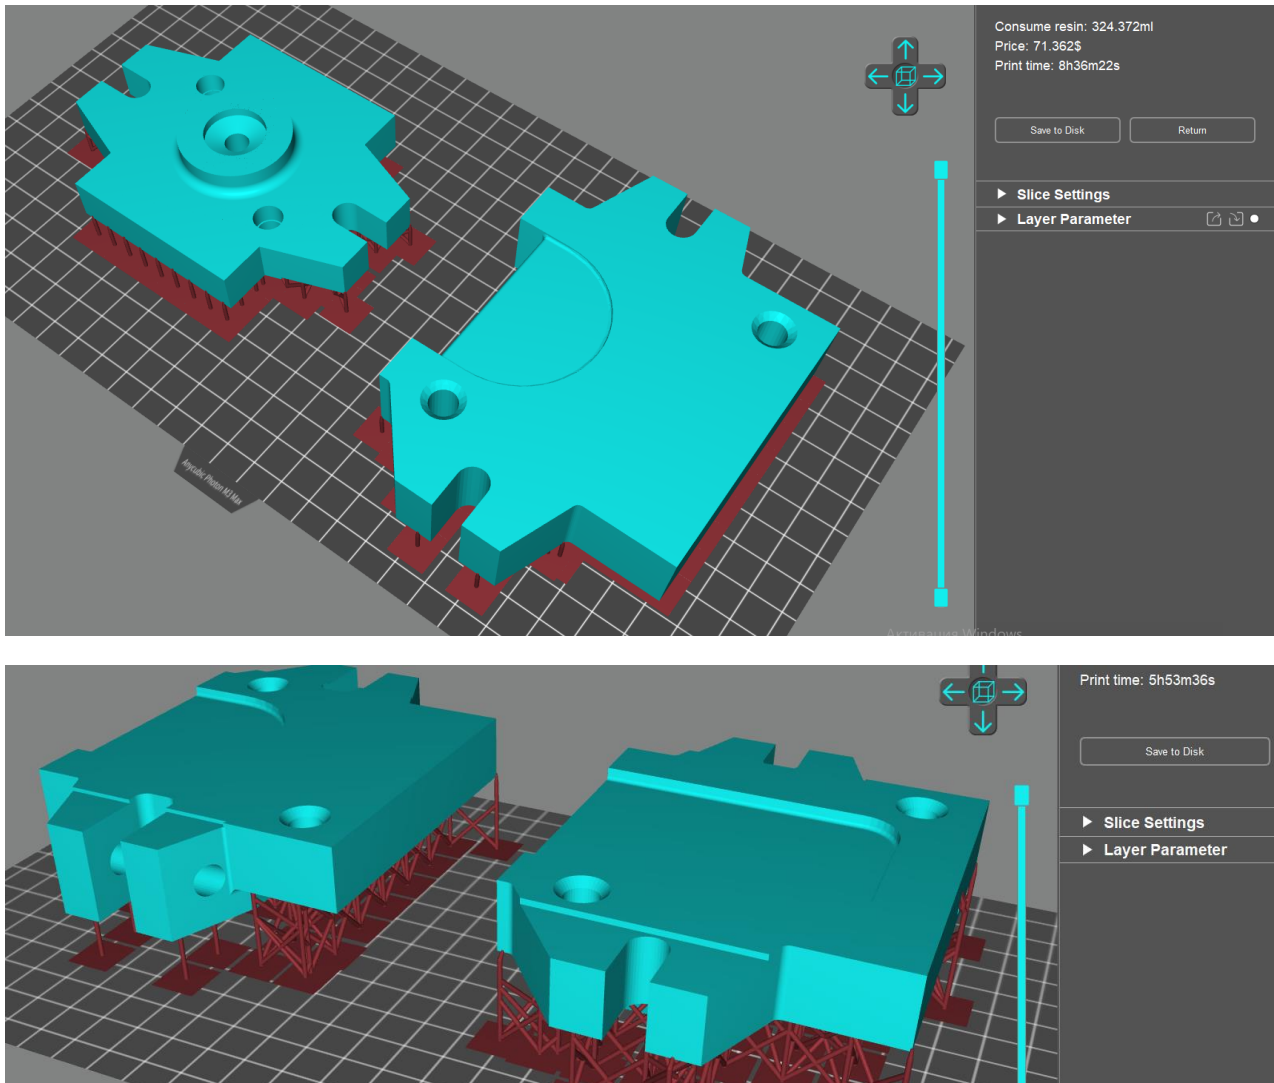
Different layouts for parts on a 3D printer plate (two parts)
